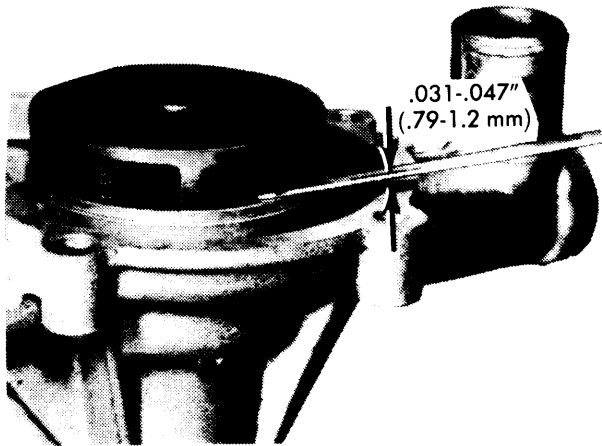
Measuring Clearance Between Water Pump Impeller and Pump Face
